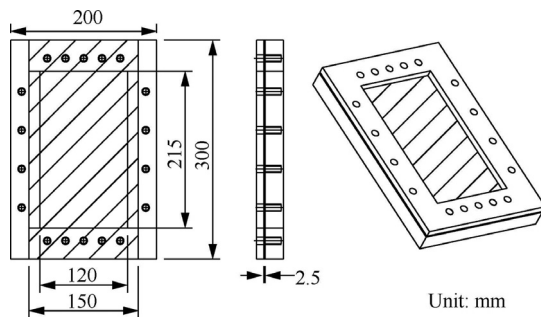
Test fixture, test specimen clamped in indicated by the hatched area.
